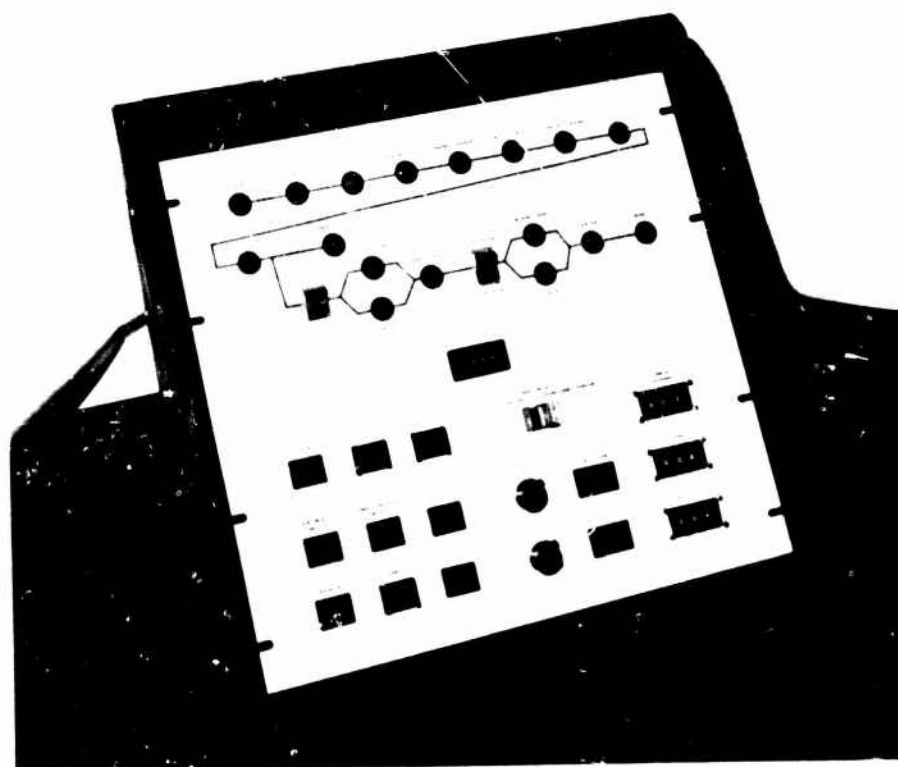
Operator's Controls for Automatic Injection Molding Control Unit
